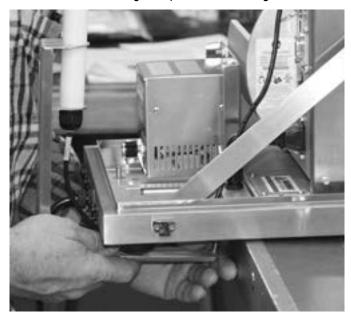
Installing Antenna Kit Bolts and Cable Through Printer Base
